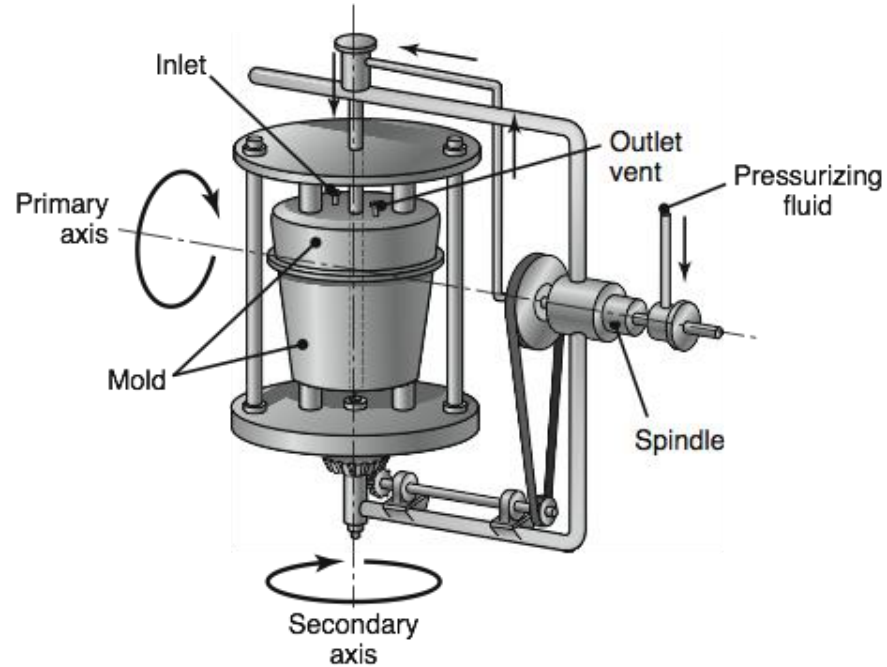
The rotational molding (rotomolding or rotocasting) process. Trash cans, buckets, carousel horses and plastic footballs can be made by this process.
